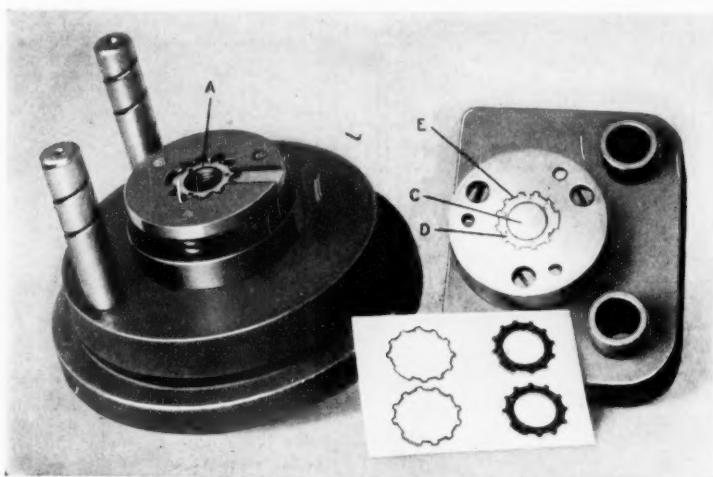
Shaving and perforating punch and die for impulse wheel.
